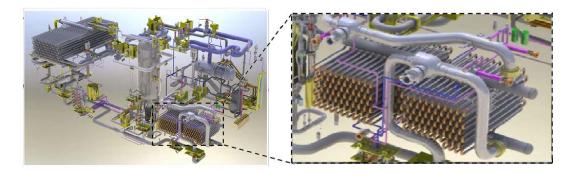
Discharge cooler module seen together with the whole compression system [9]
